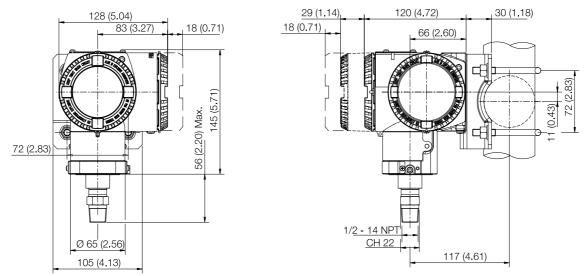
Dimensions - Barrel housing - 1/2 NPT female thread
